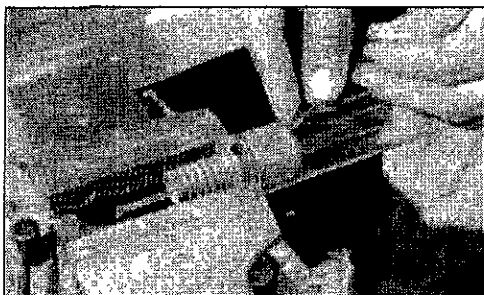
Thread cap screw into liner drive head to secure liner.
